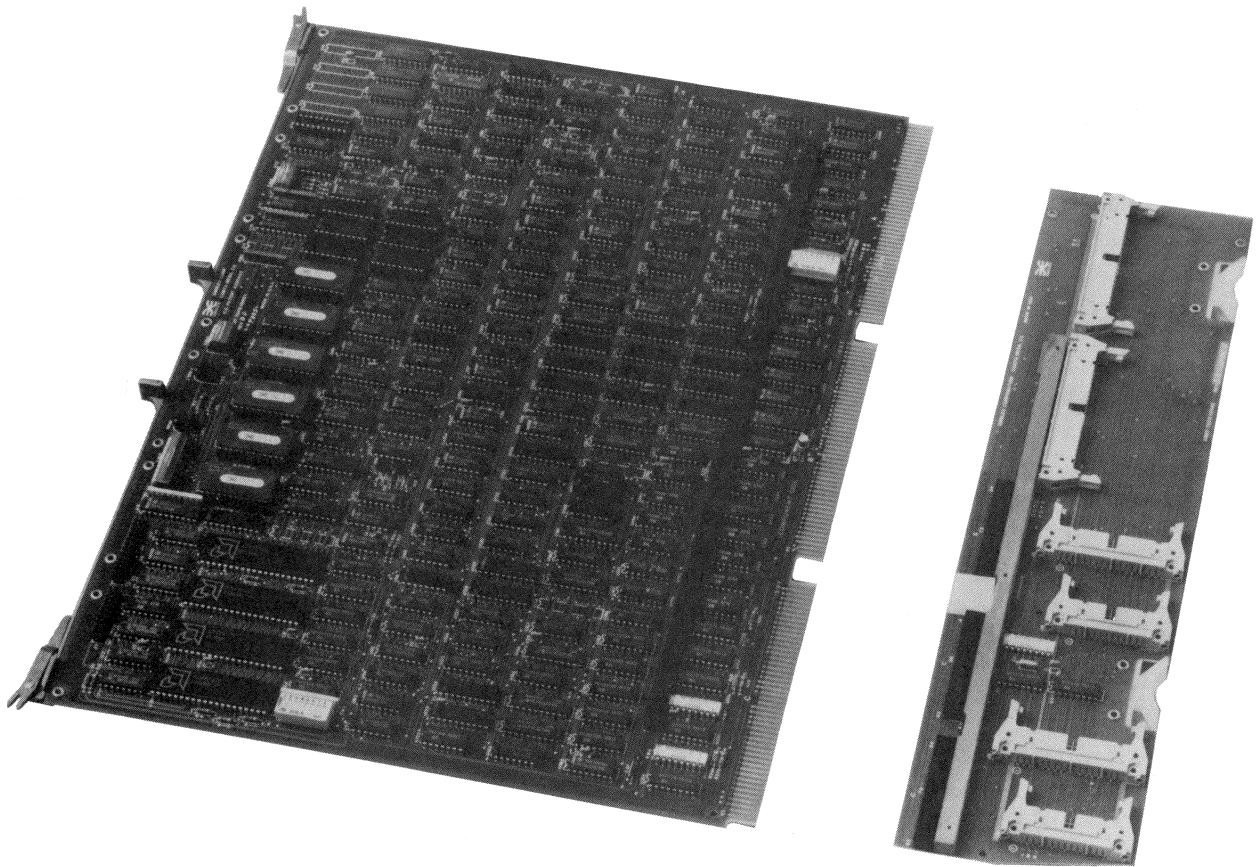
Cable Paddleboard PCBA for TC7000 Tape Coupler
